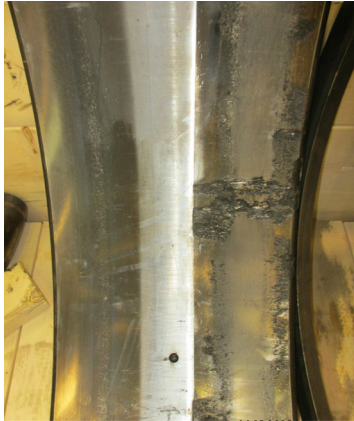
Uneven damage on the main bearing inner and outer races. Spalls and cracks have developed on the downwind raceway.
